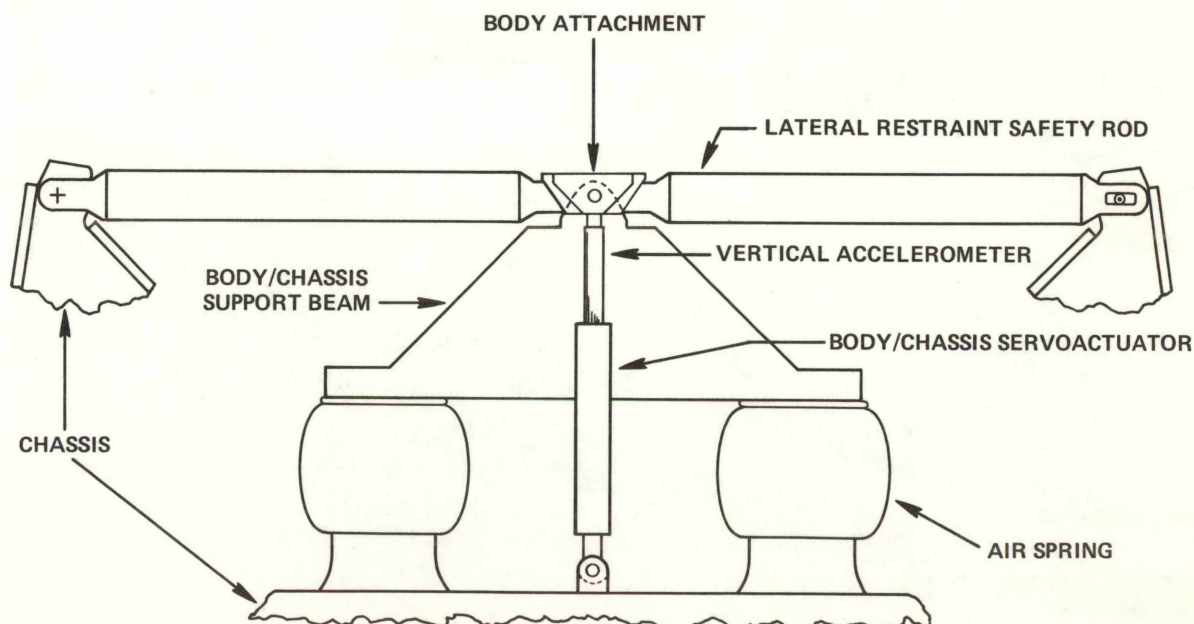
TLRV Body/Chassis Support System (Front or Rear).
